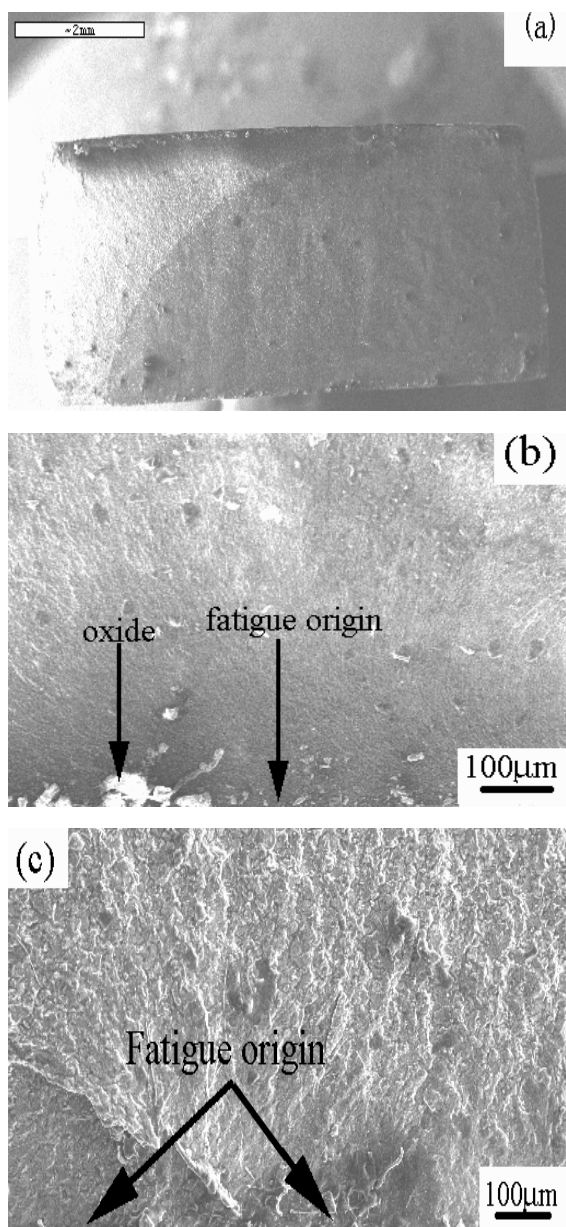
SEM photographs of overall fracture surface and analysis of fatigue crack initiate
